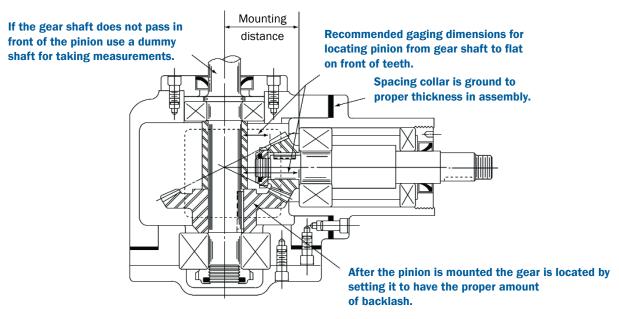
Measuring or gaging as shown is the recommended method for locating the pinion. Pinion should be set to mounting distance marked on pinion, and gear should be adjusted to give correct backlash.
